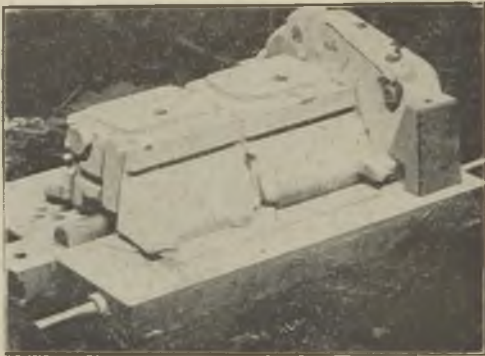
MOTOR CRANK CASE. BOTTOM PART OF MOULD, WITH THE CORES IN POSITION.
